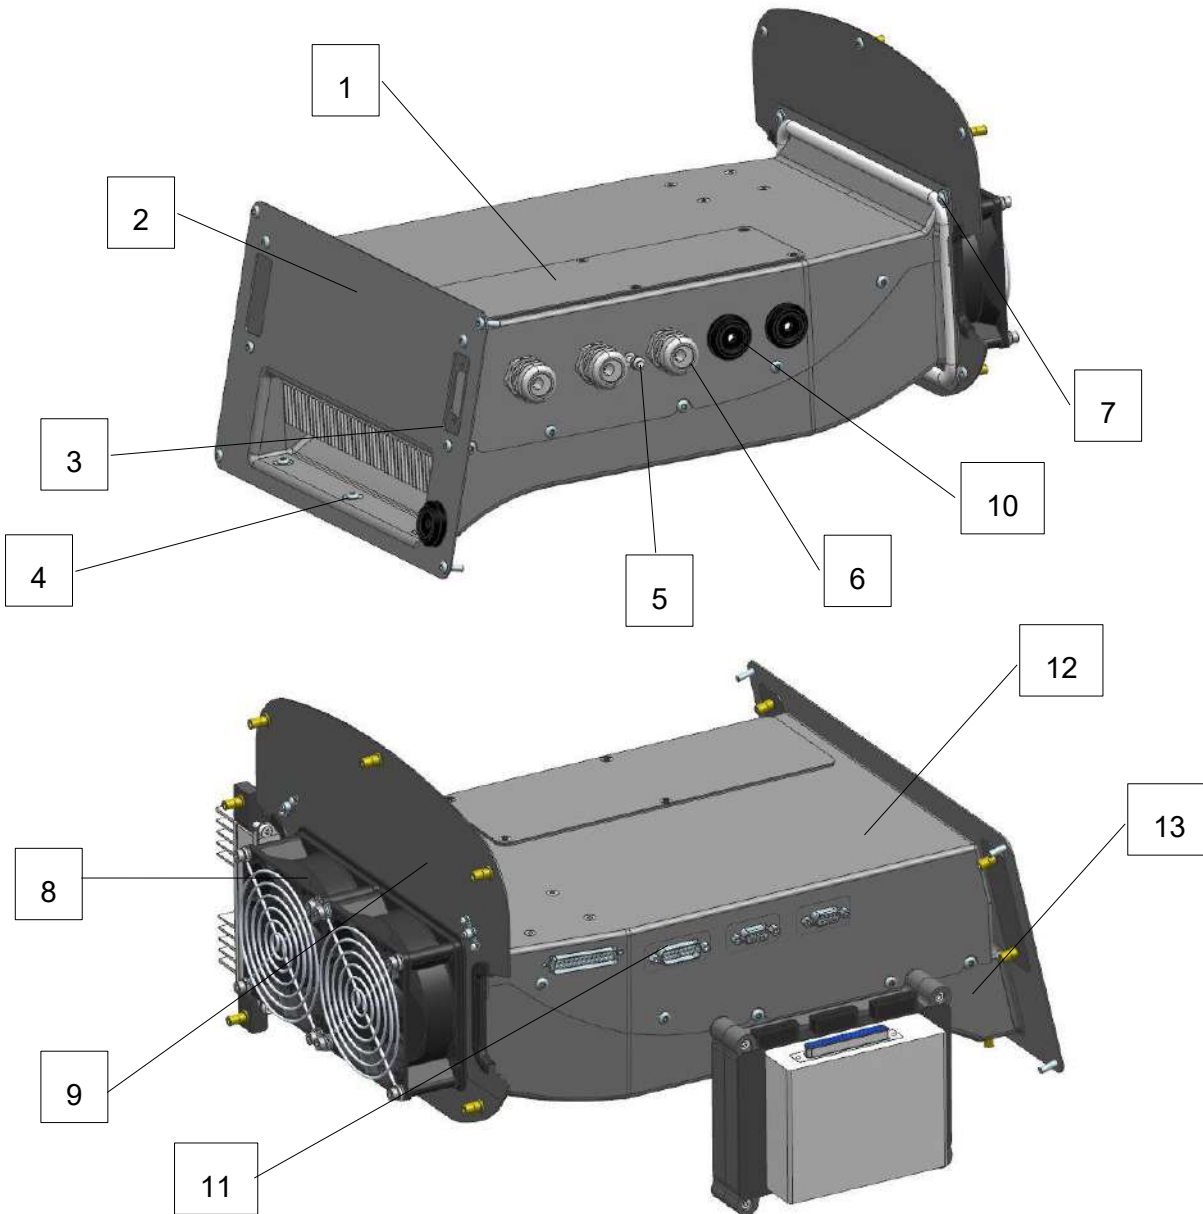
and Figure 4-18 illustrate the position of the air-cooled motor controller system.
